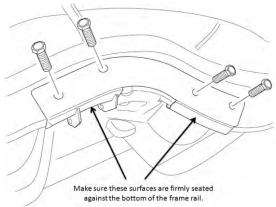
Use the saddles as templates to drill holes, and secure with $\frac{1}{2}$ " bolts. Passenger side shown.
